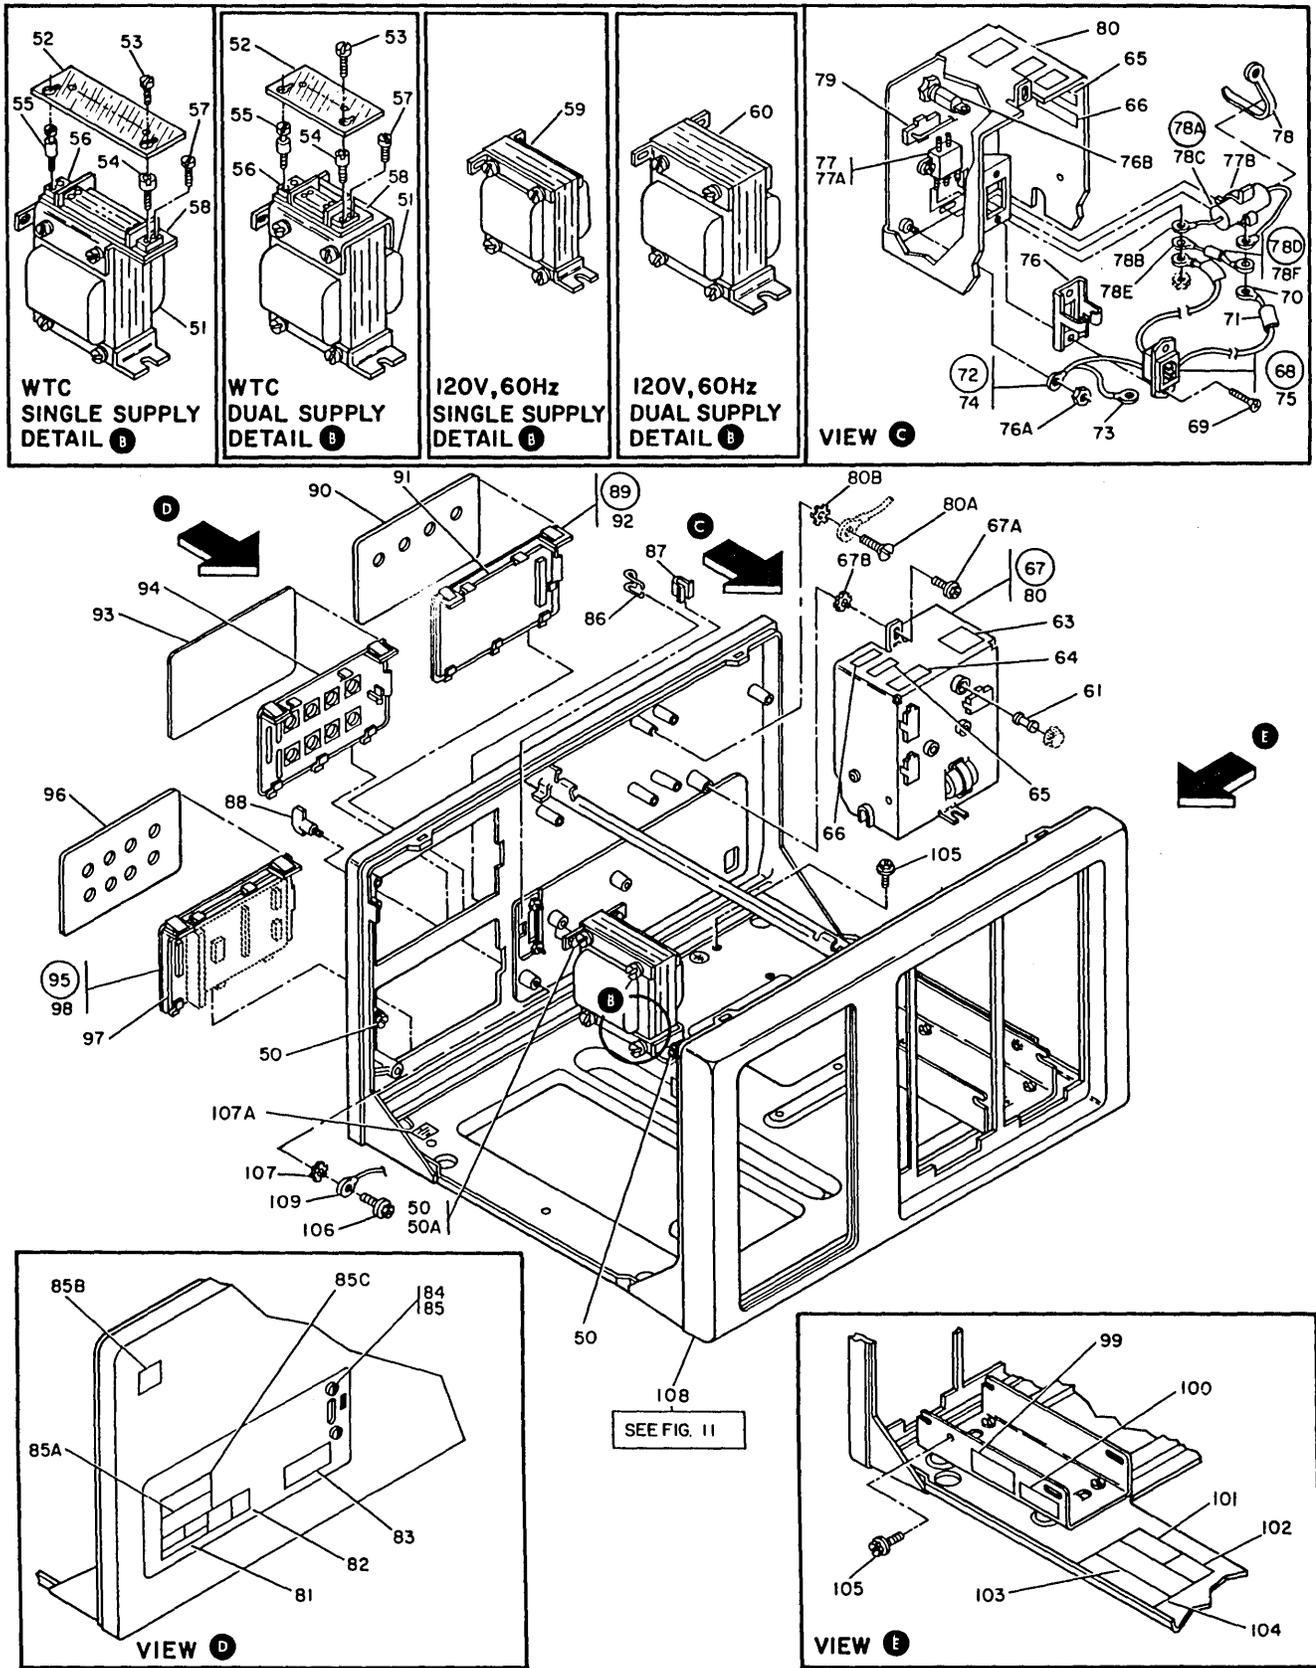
FINAL ASSEMBLY 3274 (SHEET 2 OF 2, INDEX NOS. 50-109)
